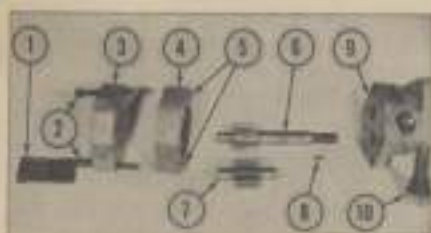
Exploded view of Webster power steering pump used on D-17 non-diesel models, tractor Serial No. D17-42001 and up. Pump is also used on diesel models, tractor Serial No. D17-38963 and up, alternately with a Barnes pump.
